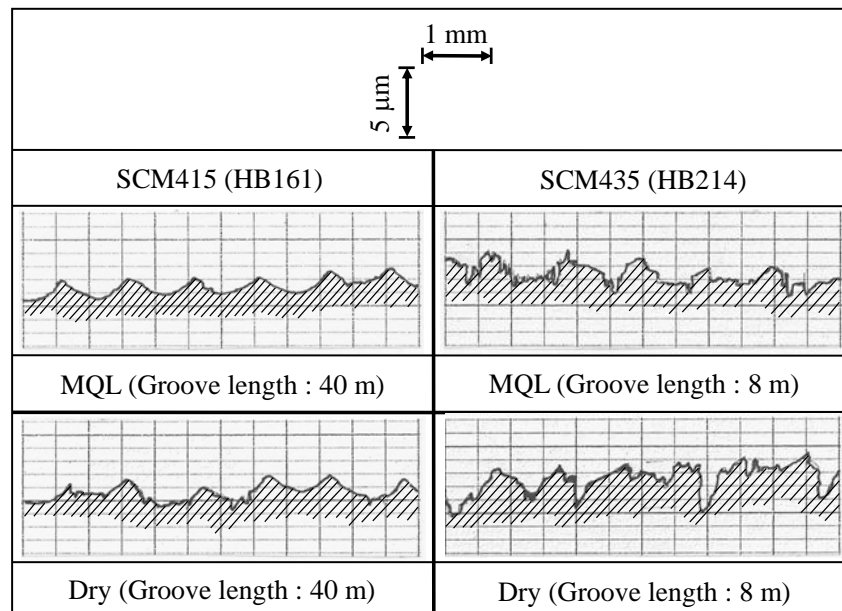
Profiles of the finished surface (SCM415 cutting speed: 117m/min, SCM435 cutting speed: 86 m/min)
